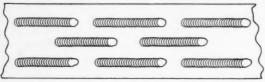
Weld metal should be deposited in short lengths and then allowed to cool.
